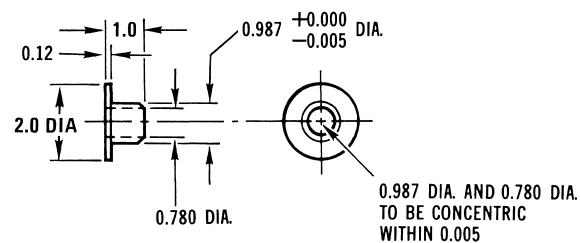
Horizontal Stabilizer Single Shipping Container (Sheet 9)
